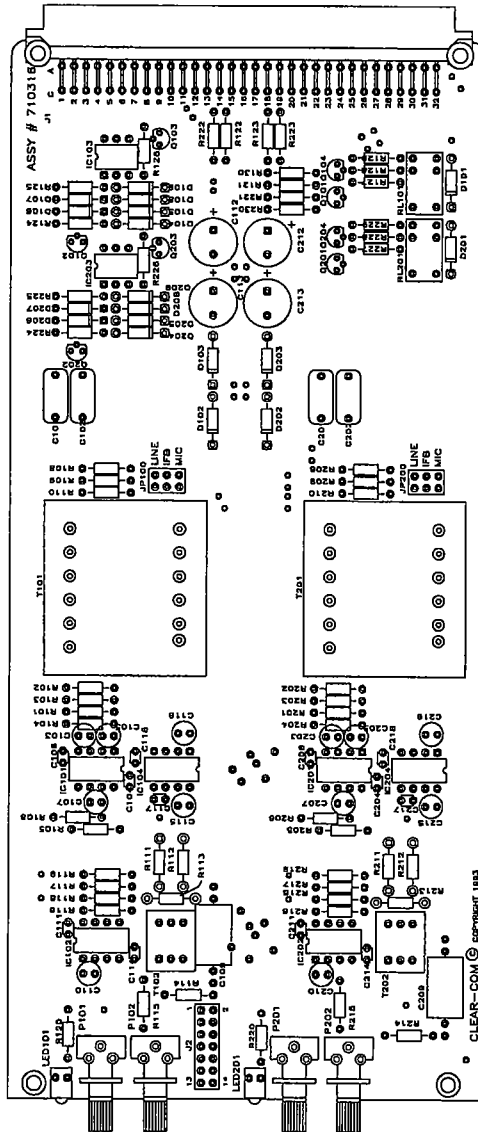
Assembly Drawing - FOR-22 Main PCB, Rev. A
